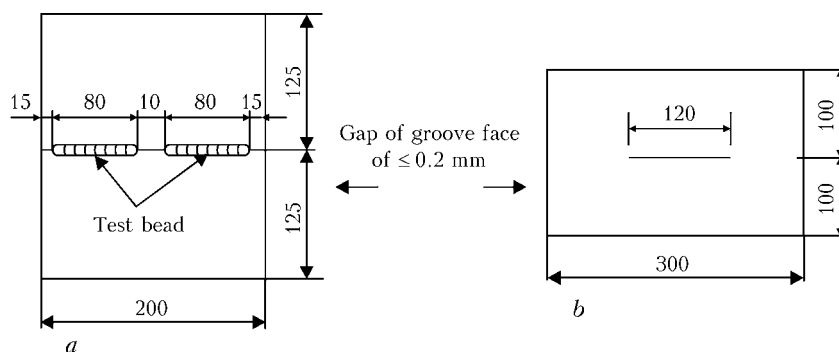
Shape of the weld cracking test plate 20 (a) and 80 (b) mm thick
